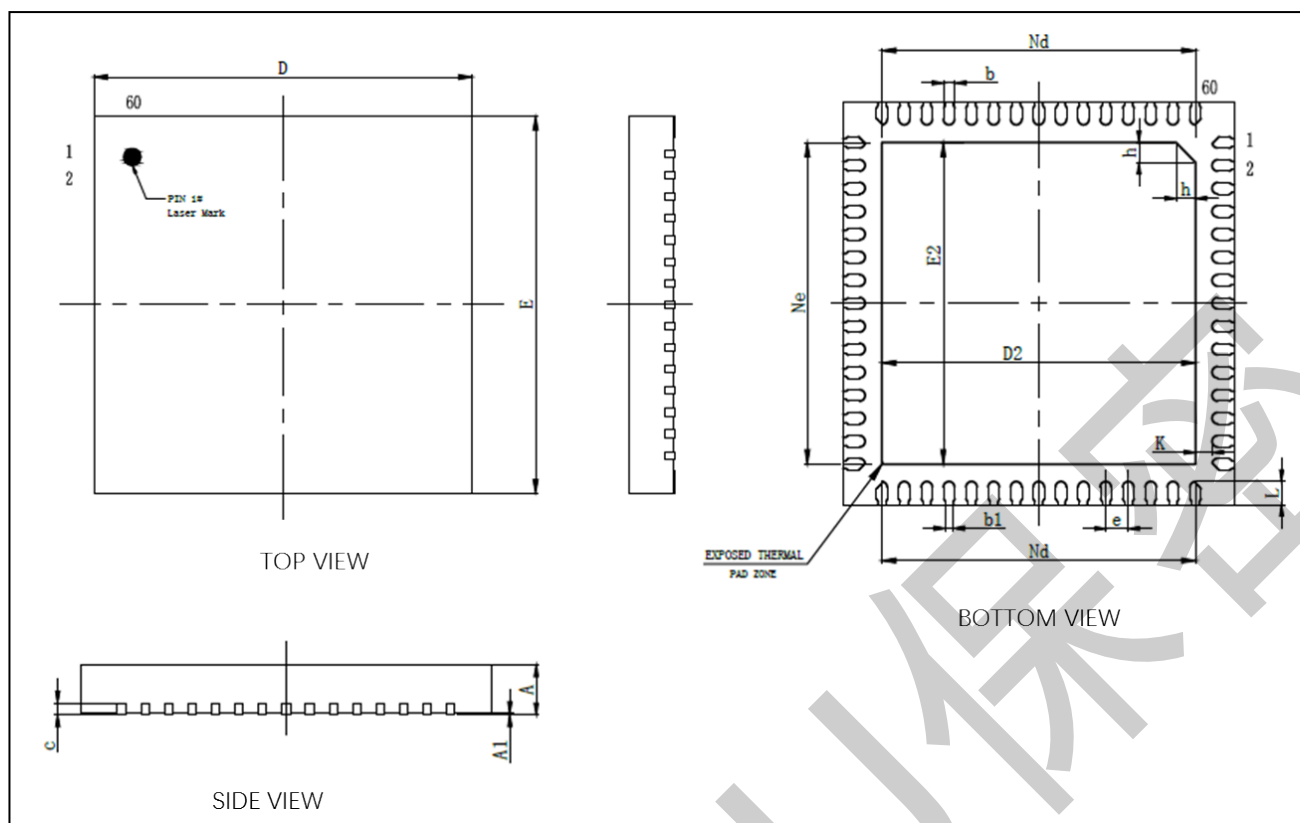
QFN60L 7 x 7 mm 60-pin package outline
